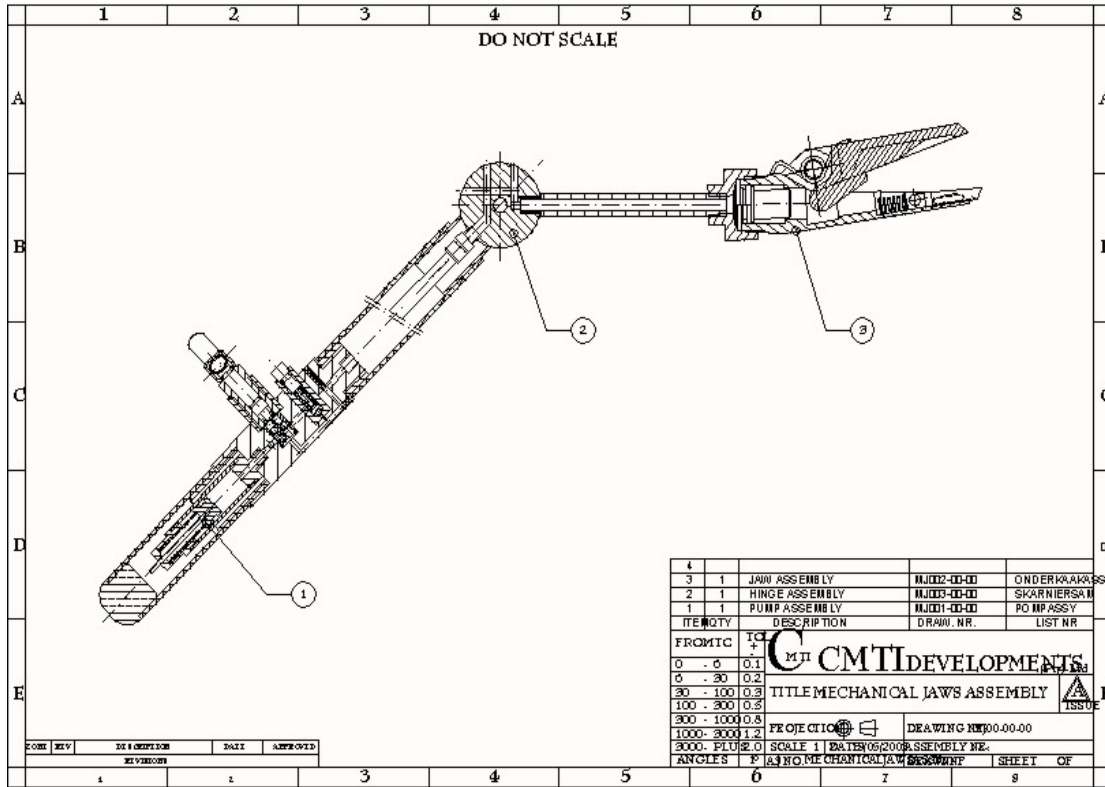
Assembly drawing of prototype mechanical “jaws”.
